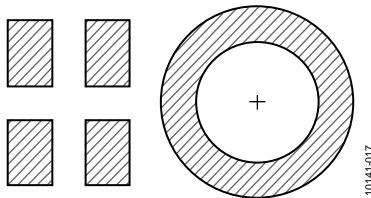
Example PCB Land Pattern with No Enclosing Ring
